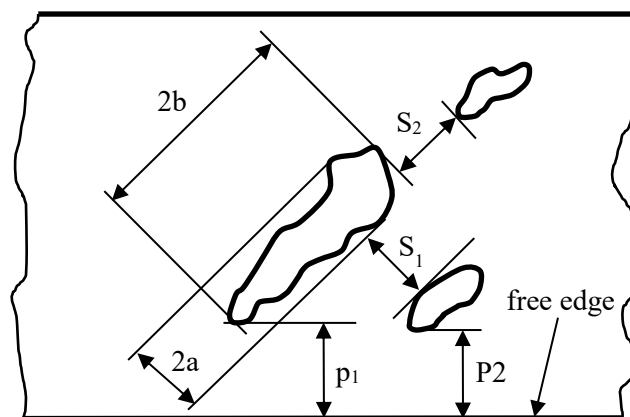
Revised criterion for flaw dimension measurement and flaw interaction [23].
